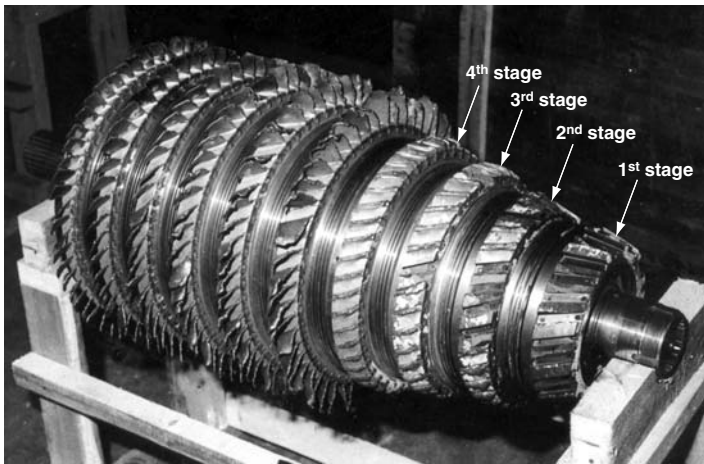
A view of compressor rotor B showing blades sheared in the first four stages
